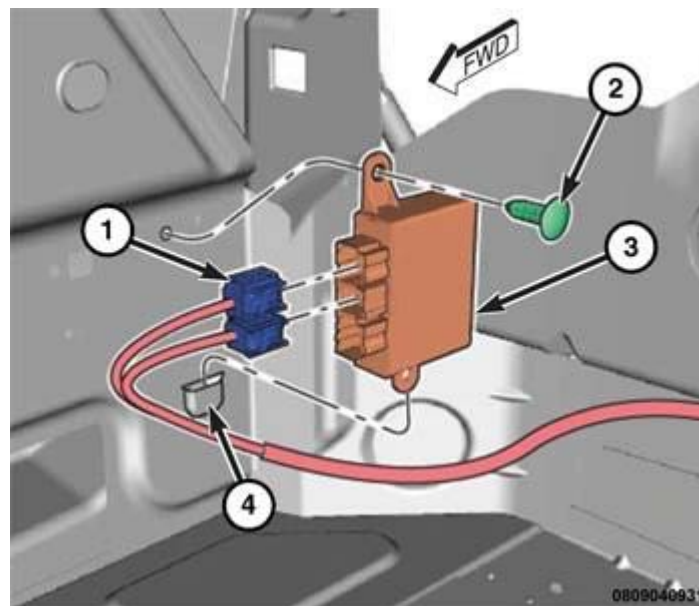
Park Assist Module (PAM), Wire Harness Connectors, Stamped Pocket & Retainer
